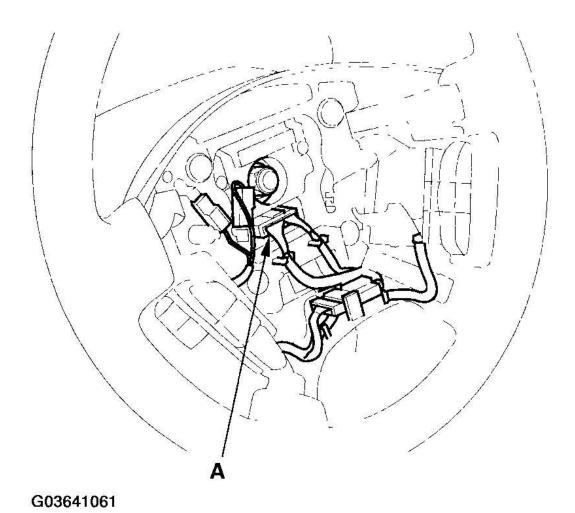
Identifying Cruise Control Switch Connector Courtesy of AMERICAN HONDA MOTOR CO., INC.
